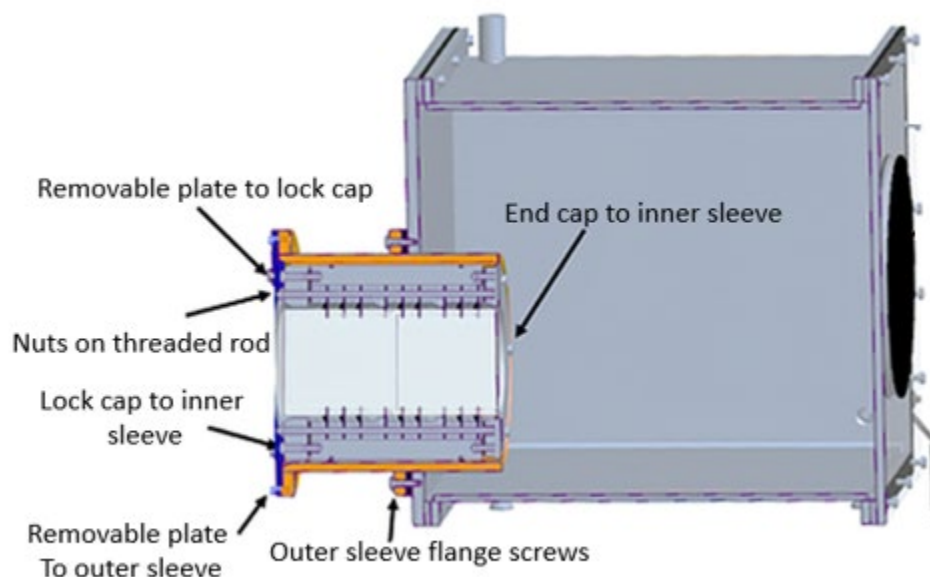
Cross Sectional View of Fastener Connections of Shield Can Sphincter Seal Assembly
